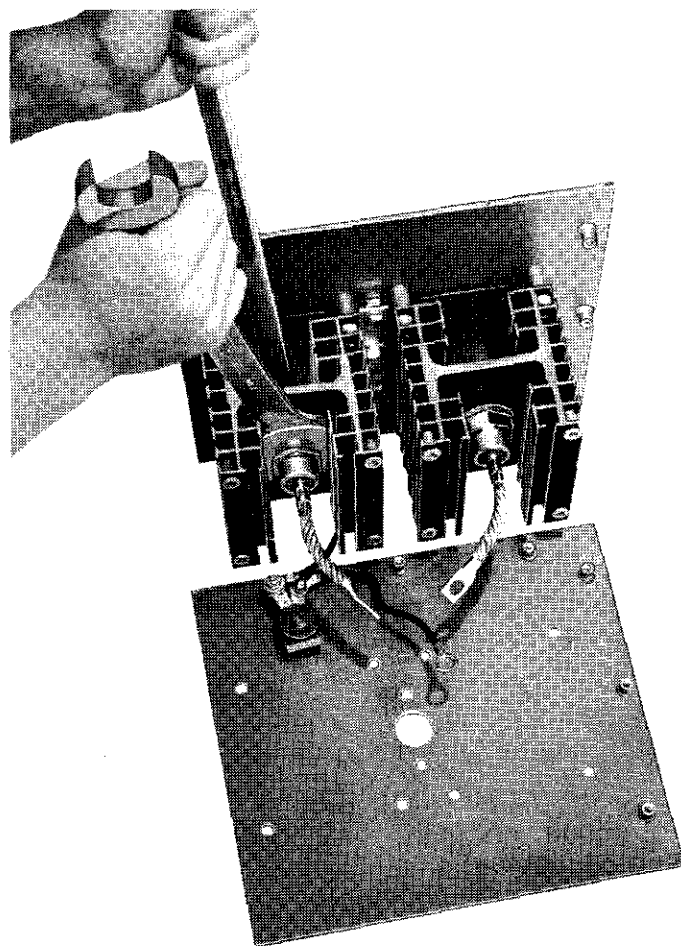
Removal Of Diodes From Rectifier Assembly
